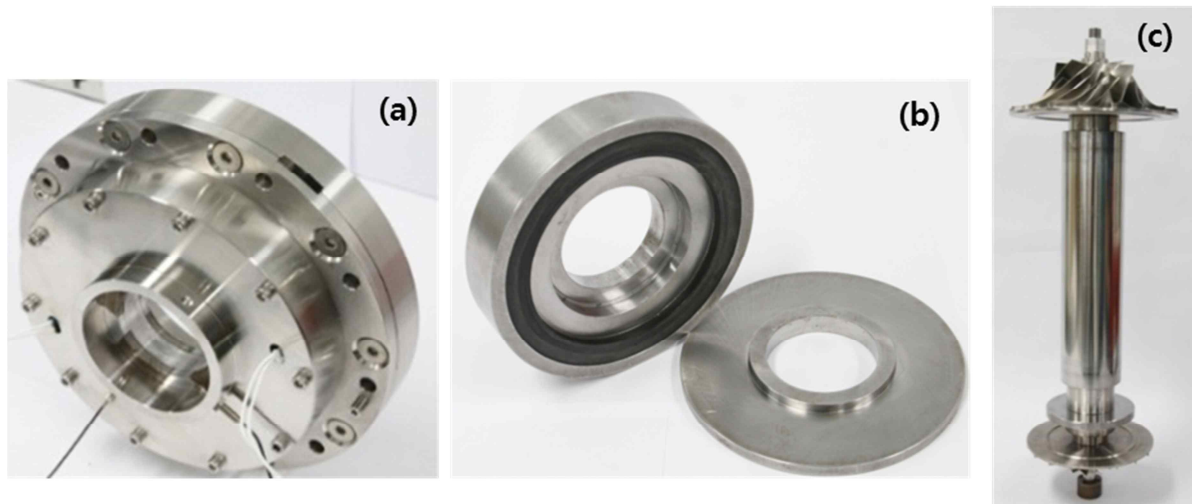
Manufactured (a) Radial Magnetic Bearings, (b) Thrust Magnetic Bearing, (c) Rotor for 300 HP class Turbo Compressor
